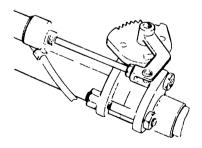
CHECK ACTUATORS FOR BUTTERFLY VALVES.
